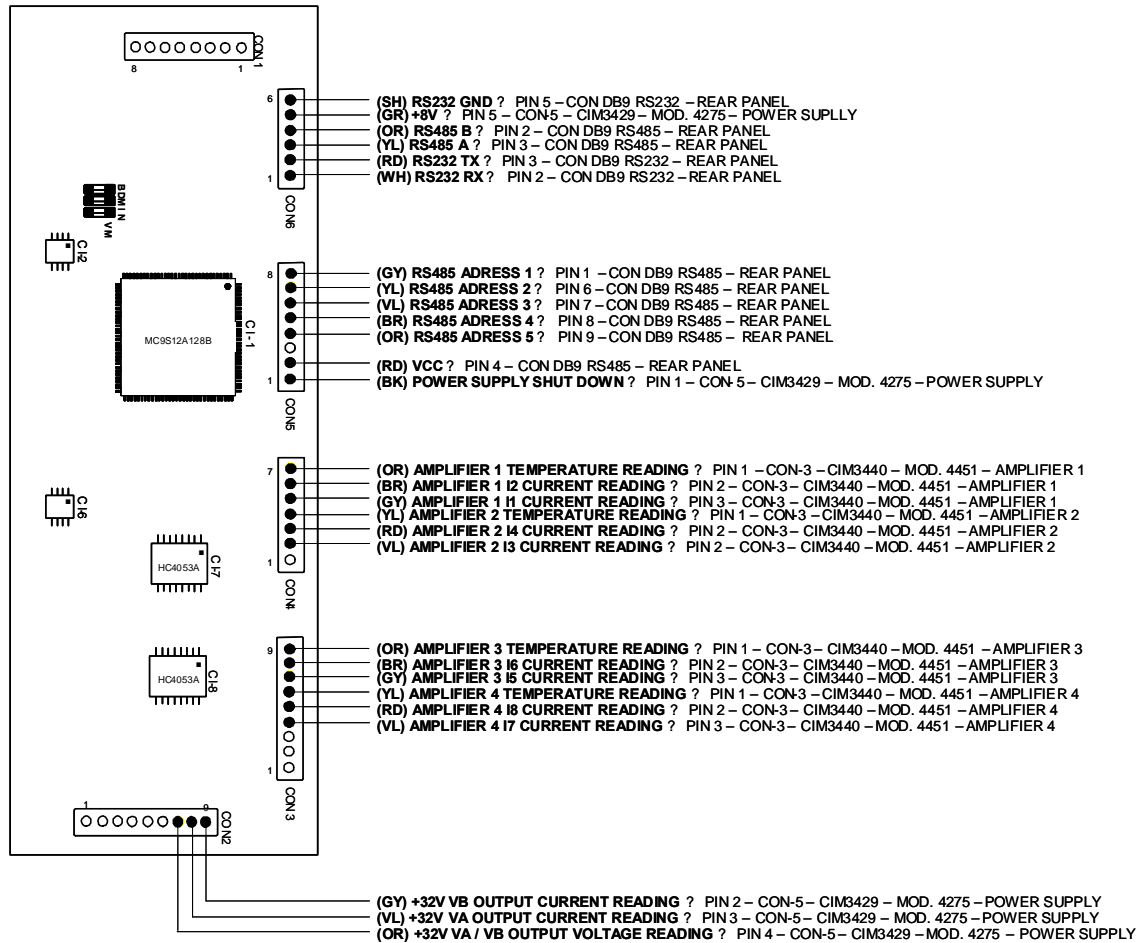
SCU – RF power drawer, PCB CIM 3452. Wiring and connection diagram
